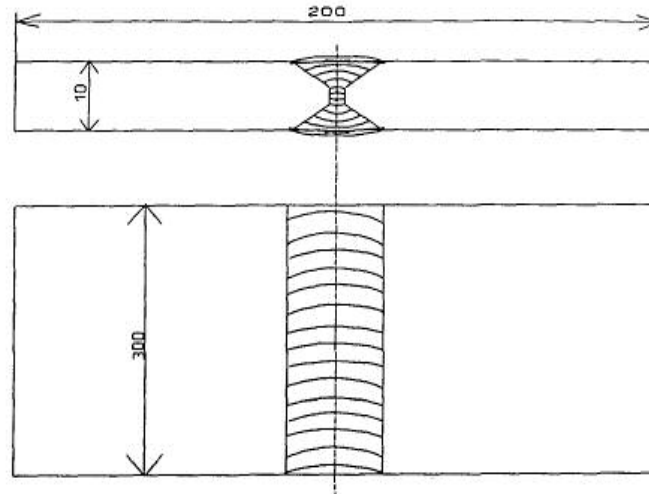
Schematic of the double sided V-groove workpiece with the predicted weld [11]
